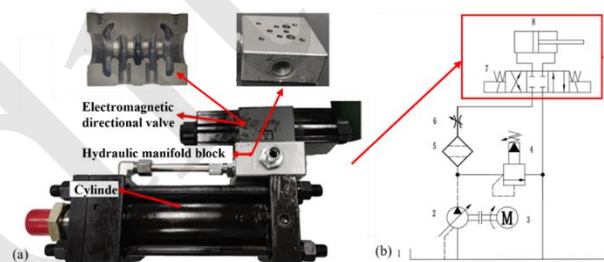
(a) Conventional machined valve-controlled cylinder; (b) Schematics of the hydraulic transmission system
